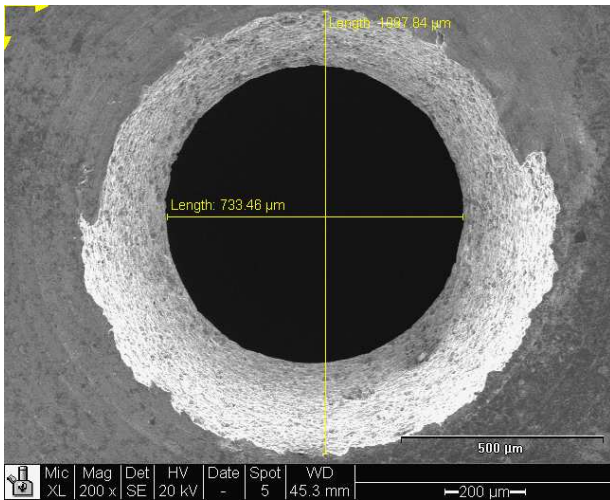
Axisymmetric nozzle fabricated in 303 stainless steel using EDM showing realized dimensions
